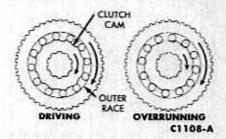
Over-Running Clutch (Free-Wheel Unit) Operation
